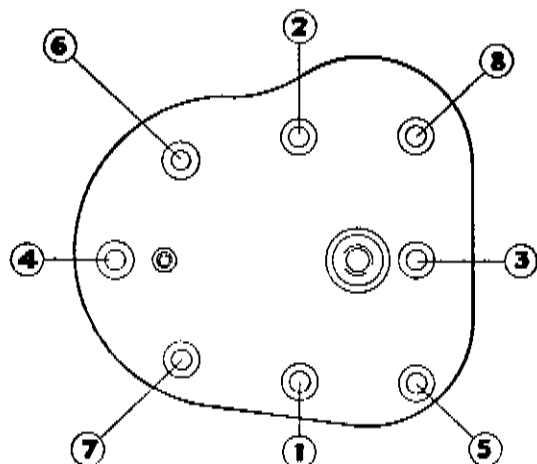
Order of tightening cylinder head bolts (S.V.)
